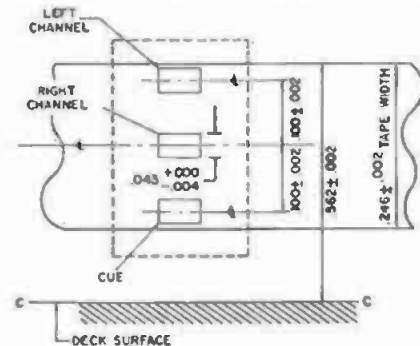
D. NAB Standard head placement for two-track prerecorded stereophonic tapes. If a second stereo head is used it is placed 1.250 inches from the first head.
